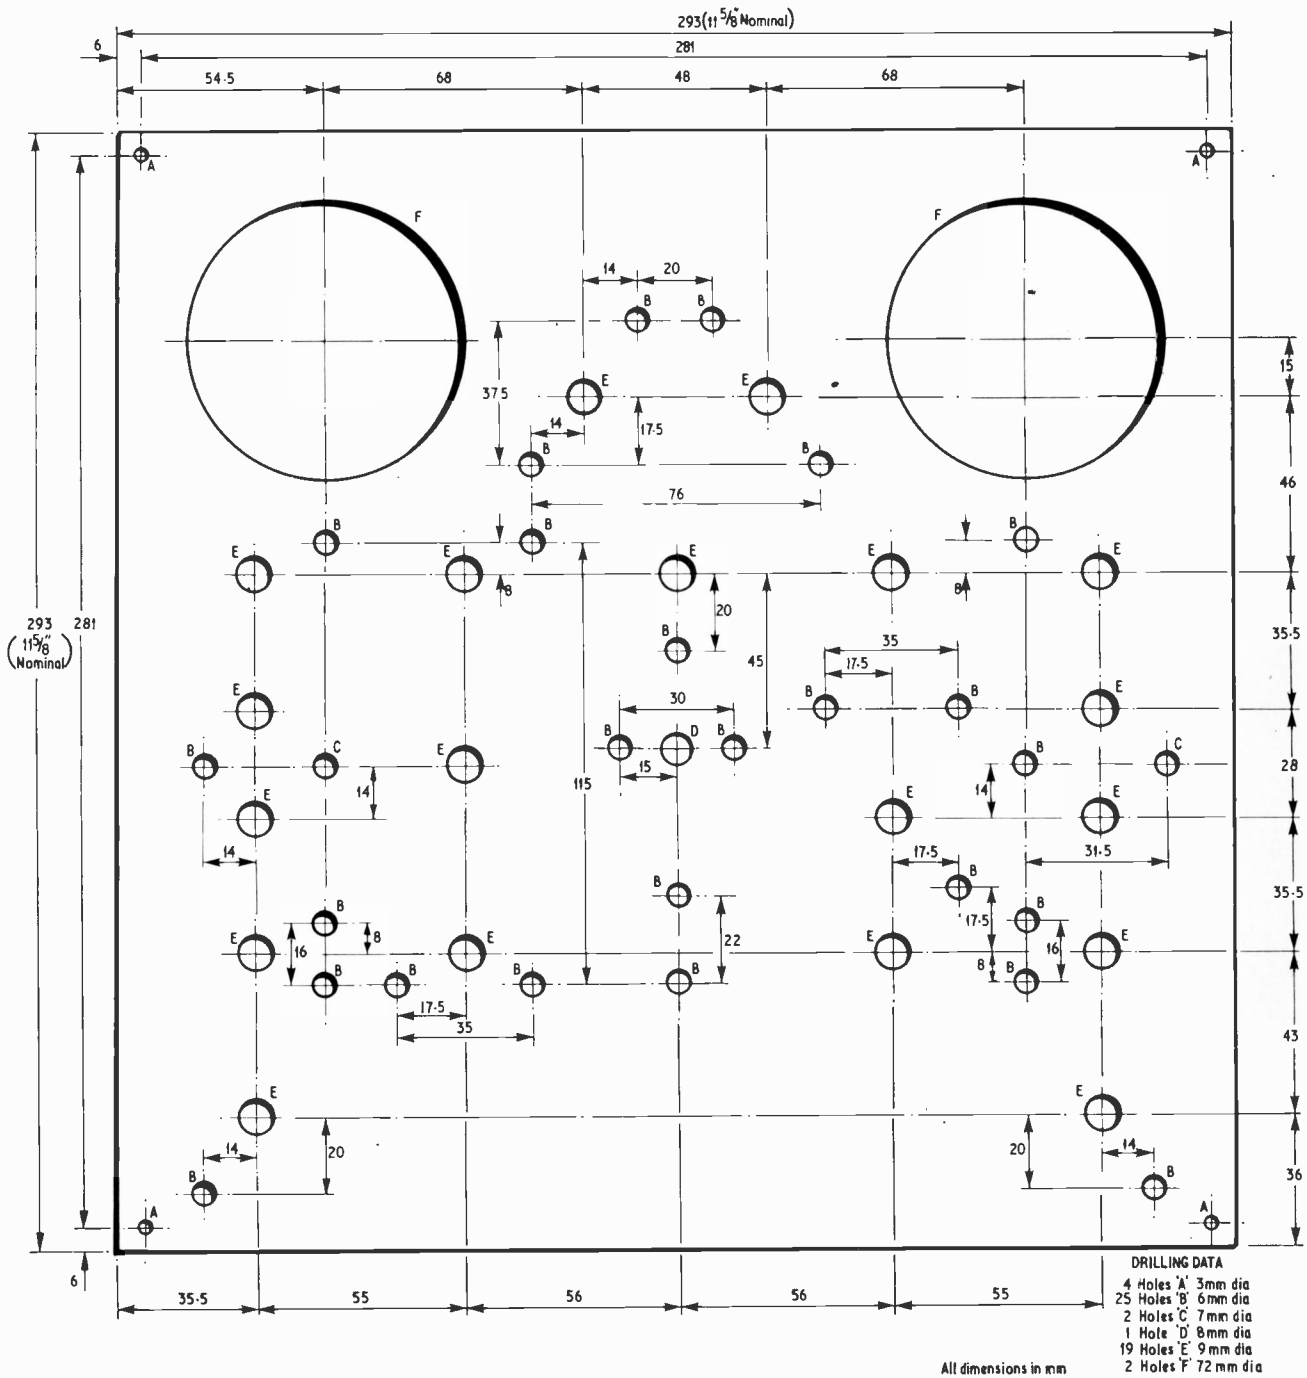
Details of the front panel drilling required for use with scheme shown in block form in Fig. 1.1
